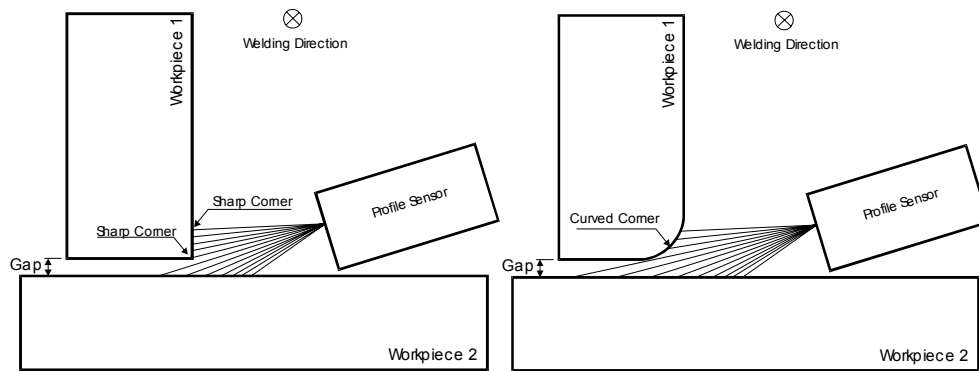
Workpiece with sharp corner and workpiece with curved corner, respectively.
